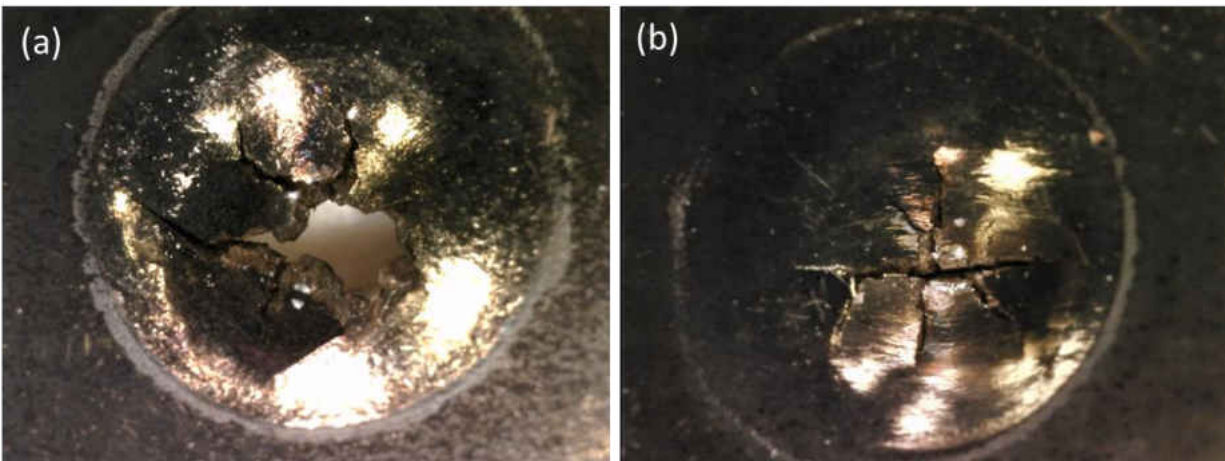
Fracture surfaces of as-manufactured IN939V (a) vertical and (b) horizontal samples tested in cyclic conditions in the as-manufactured condition with  $R=0$  at  $427^{\circ}\text{C}$ .
